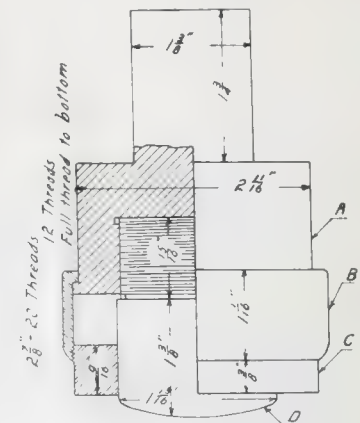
A. DIE FOR FORGING SOCKET PLUGS
